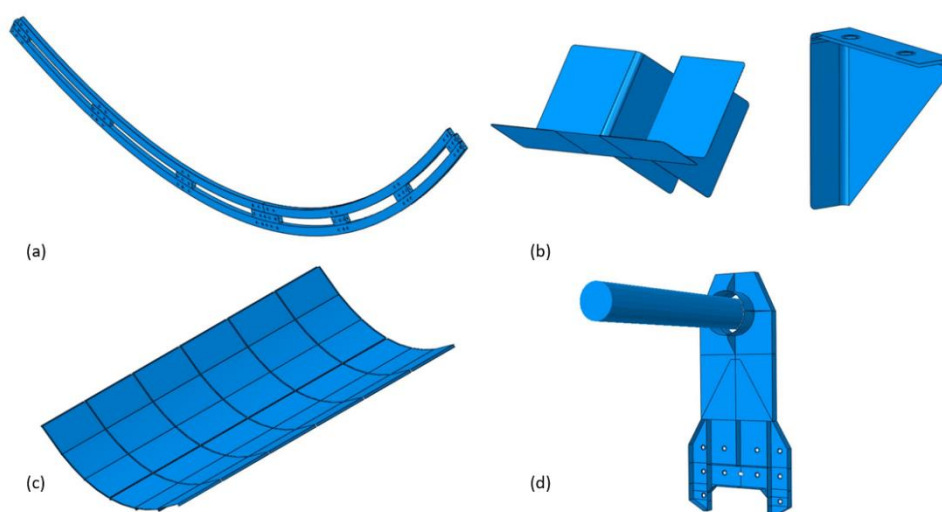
Numerical model of the most important parts of the trough: (a) end rib, (b) internal joints, (c) panel assembly, (d) king post.
